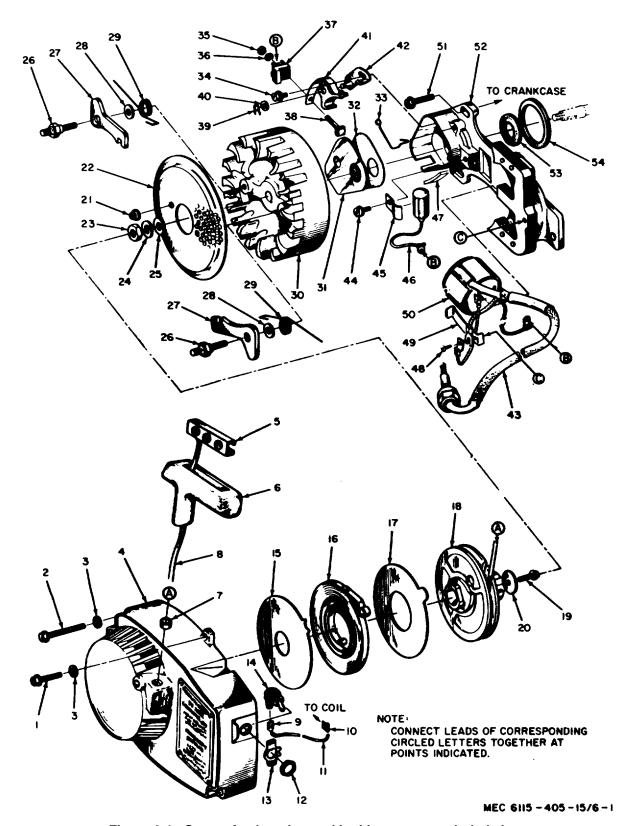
Starter fan housing and ignition parts, exploded view.
